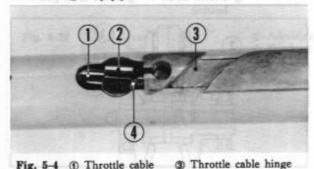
① Throttle cable ② Throttle cable holder
